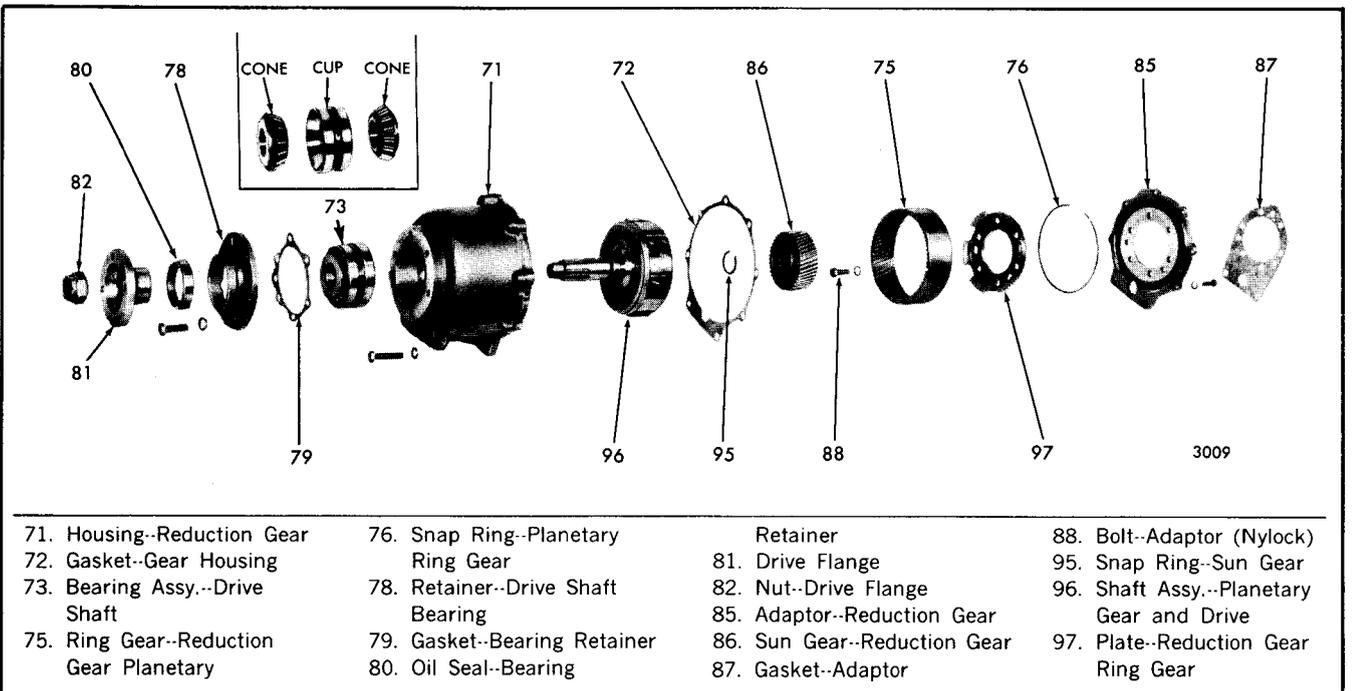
Reduction Gear Details and Relative Location of Parts (2.5:1 and 3:1 Ratios)
